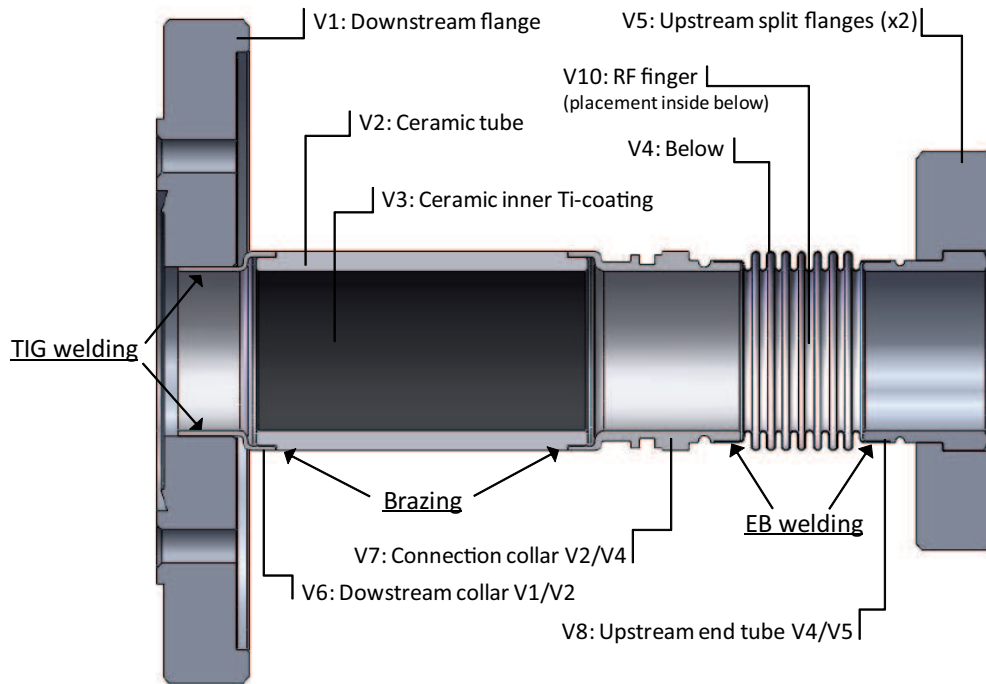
Detailed view of the BPS monitor vacuum chamber assembly indicating its main parts and the welding techniques employed.
